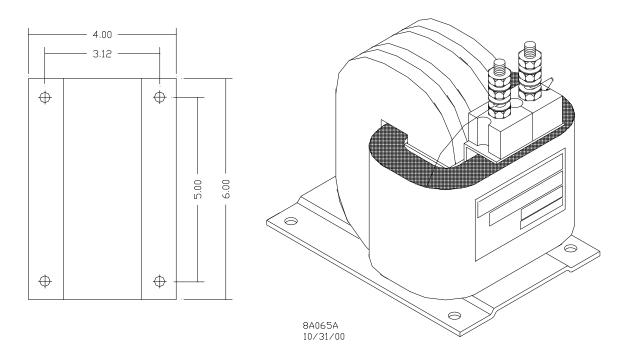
62648/8A065A Battery Choke With Mounting Dimensions
